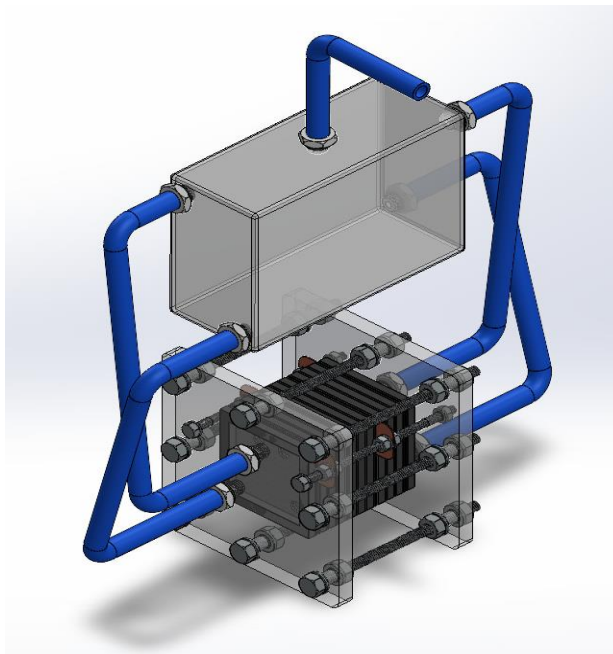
10: Isometric Elevation of the Final Assembly of the HHO kit
